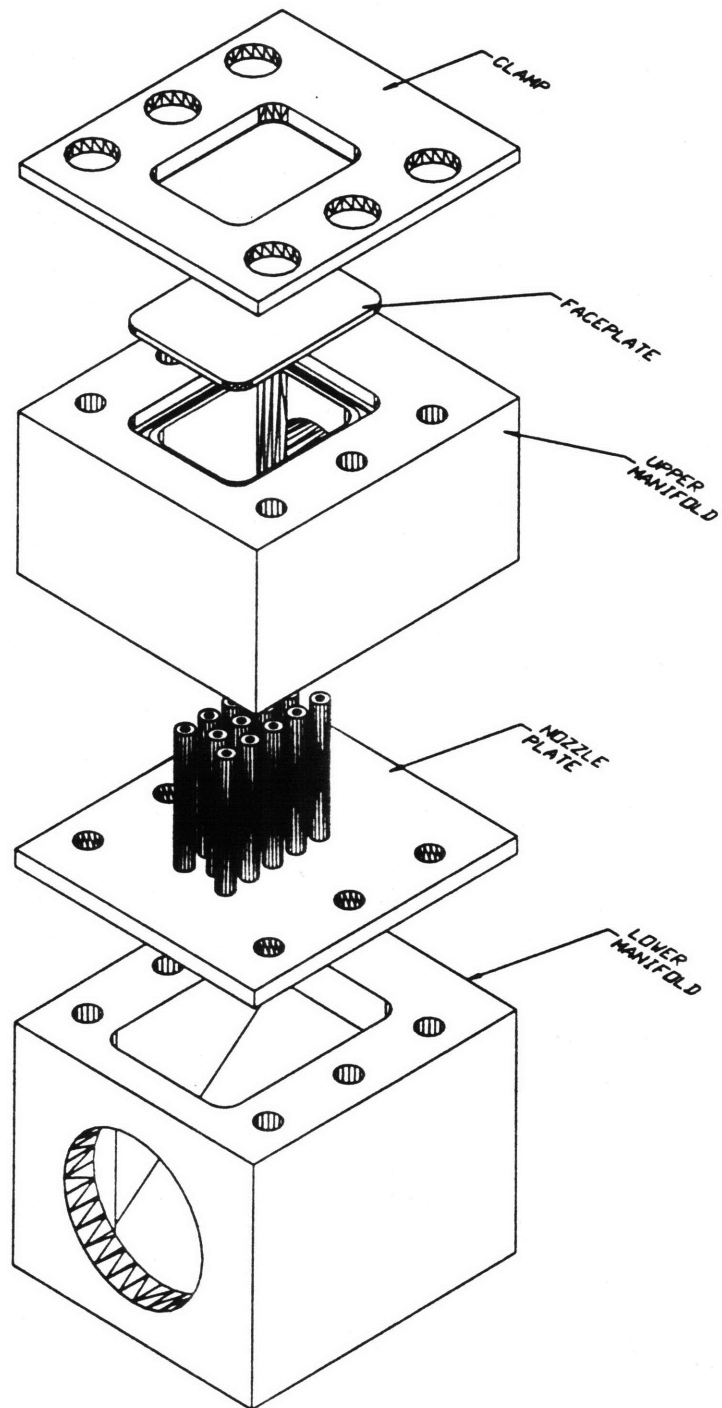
Cooling module configuration showing manifolds, jet array and faceplate.
